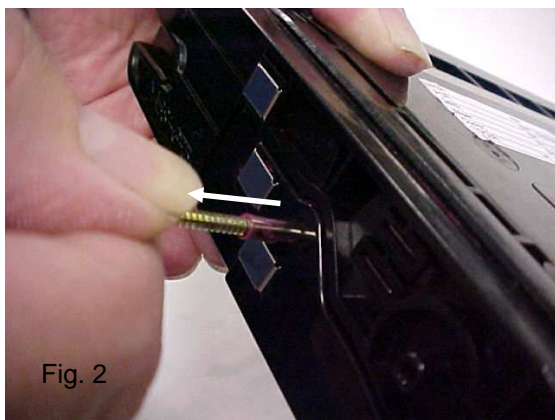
Insert a small metric screw into the short cartridge pin located on the contact side of the cartridge. Turn clockwise until the screw is threaded into the pin. Pull the pin out. Repeat procedure for the long cartridge pin on the gear side.
